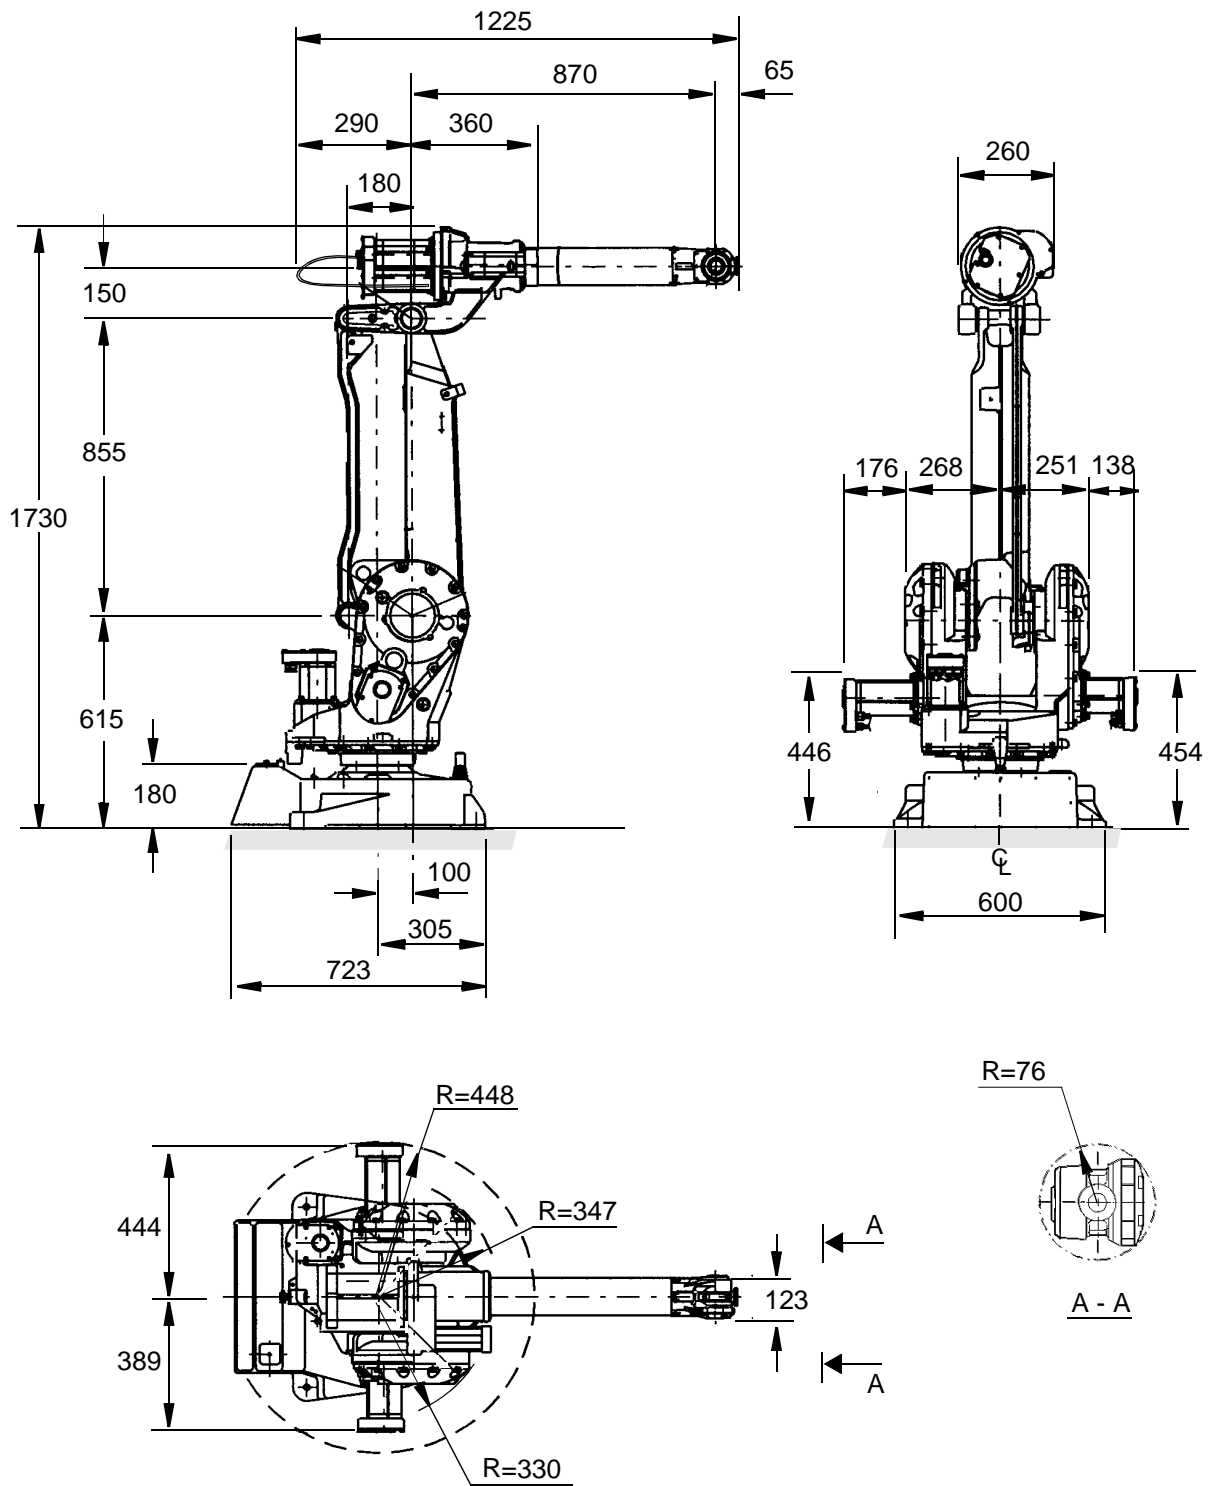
View of the manipulator from the side, rear and above (dimensions in mm).
